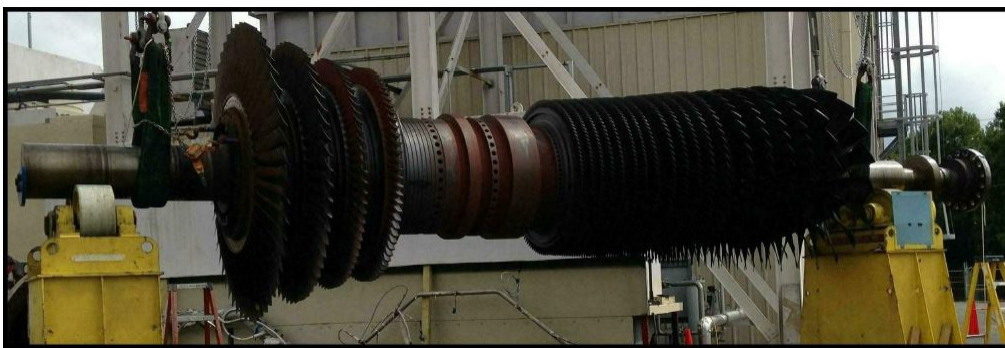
100 MW Gas Turbine Being Removed For Servicing
